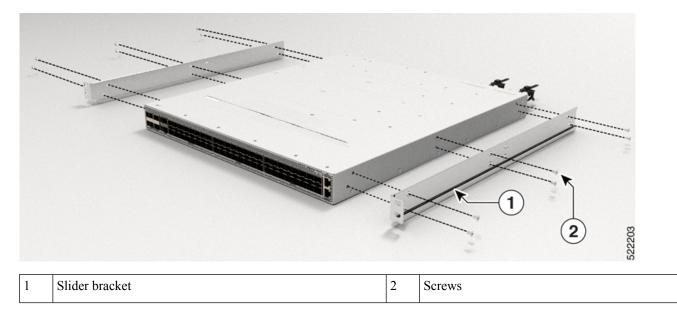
Rack-Mount Slider Assembly on a 23-inch 4-Post Rack
